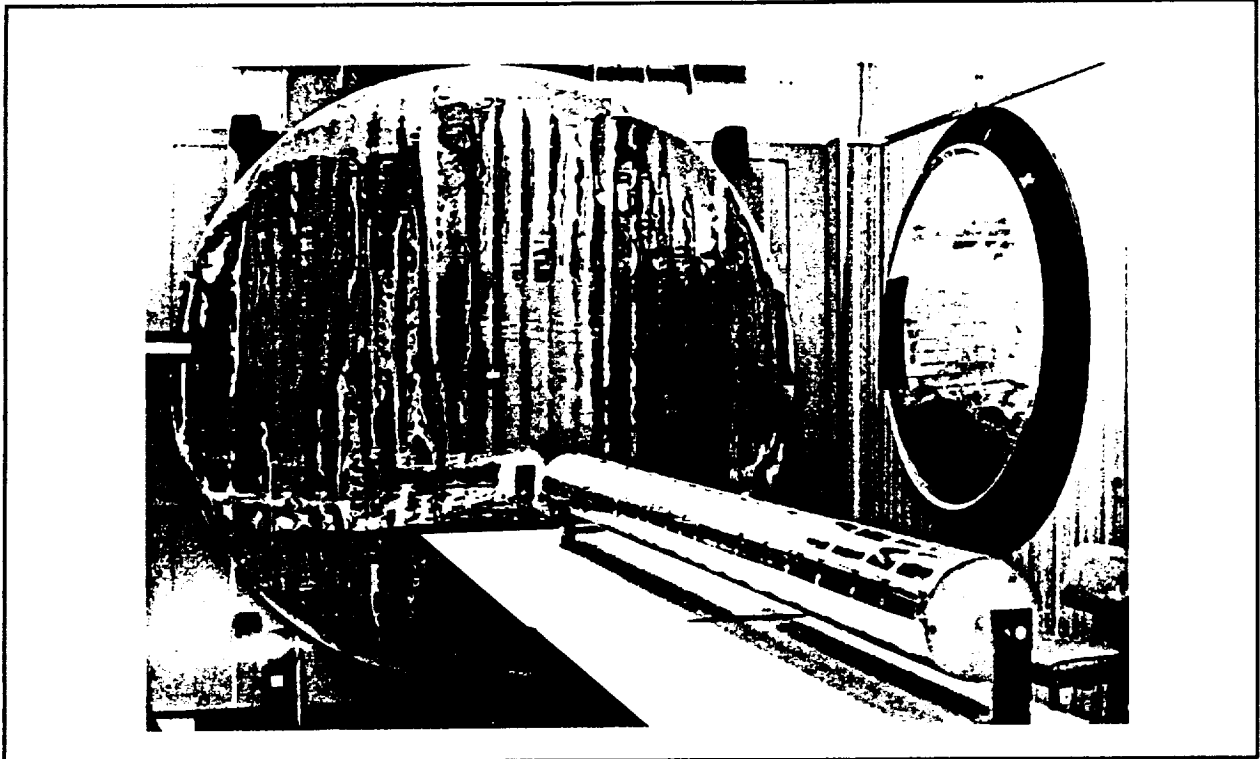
Riveted 2.8 meter Central Section and Assembly/Stowage Tube
